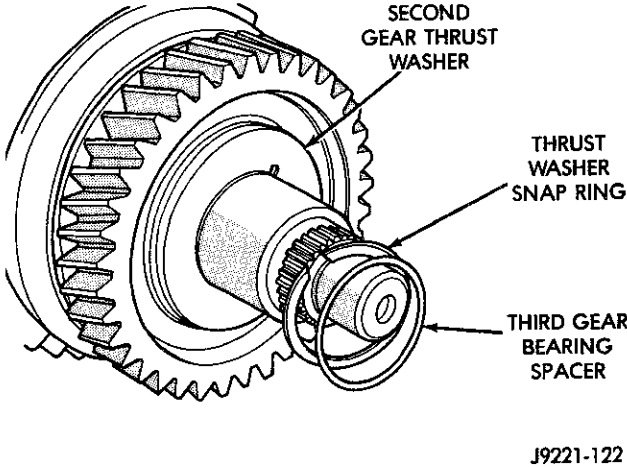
Installing Snap Ring And Third Gear Bearing Spacer
